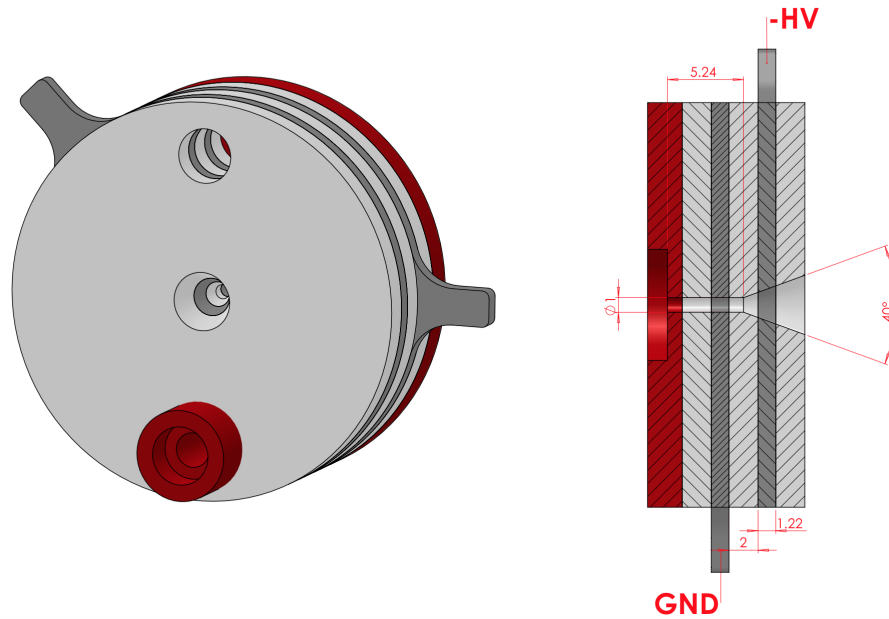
Detailed scale drawing of the discharge plate assembly. In the cross-sectional view on the left, lengths are given in [mm] and the full opening angle in degrees.
